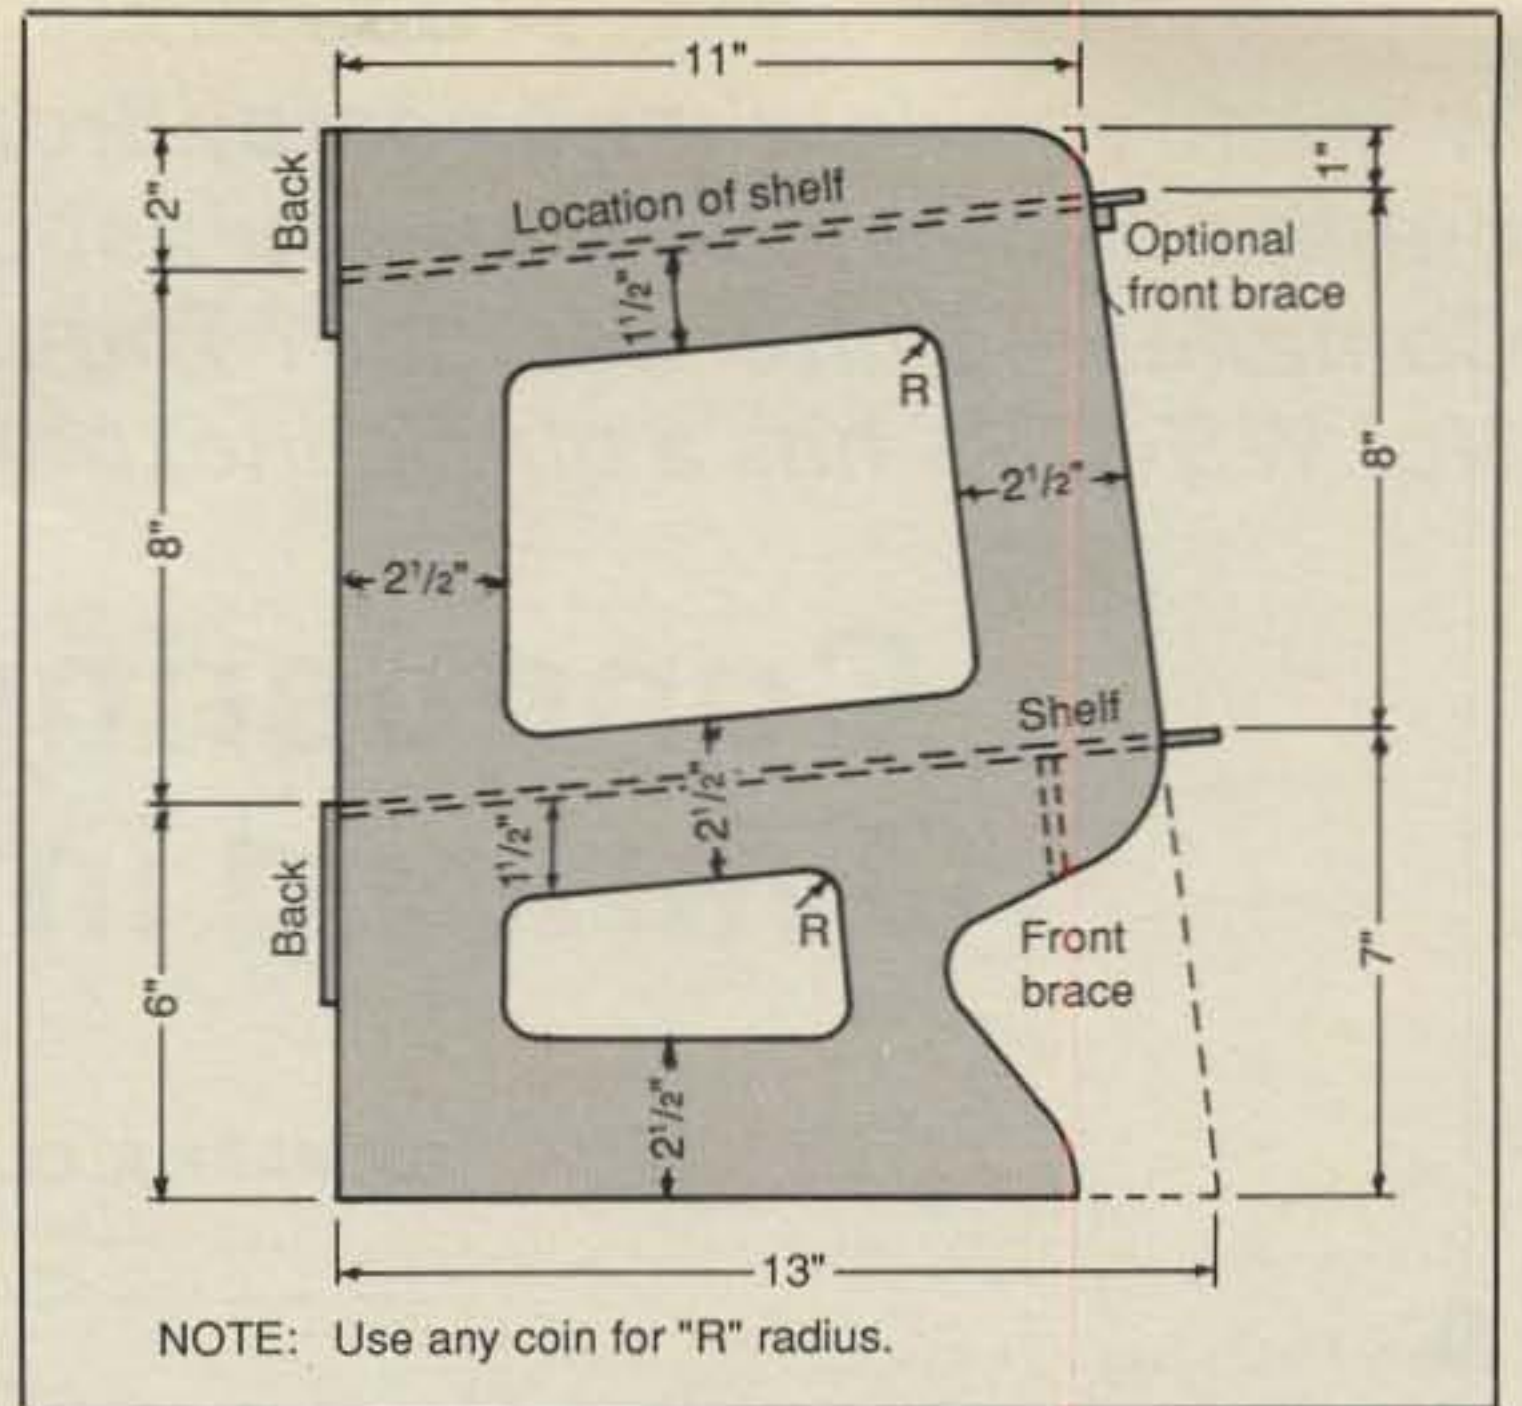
Details for side piece construction. Two are required. Remember, the cleats or the routed grooves belong on the inside.
